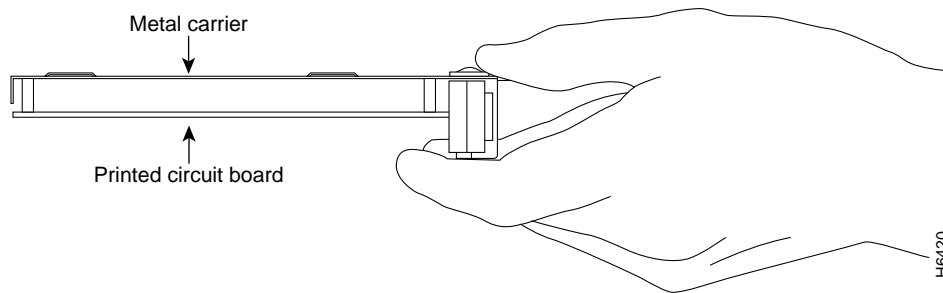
shows the location of a printed circuit board when it is installed in a port adapter metal carrier. Do not touch the printed circuit board when handling a port adapter.
